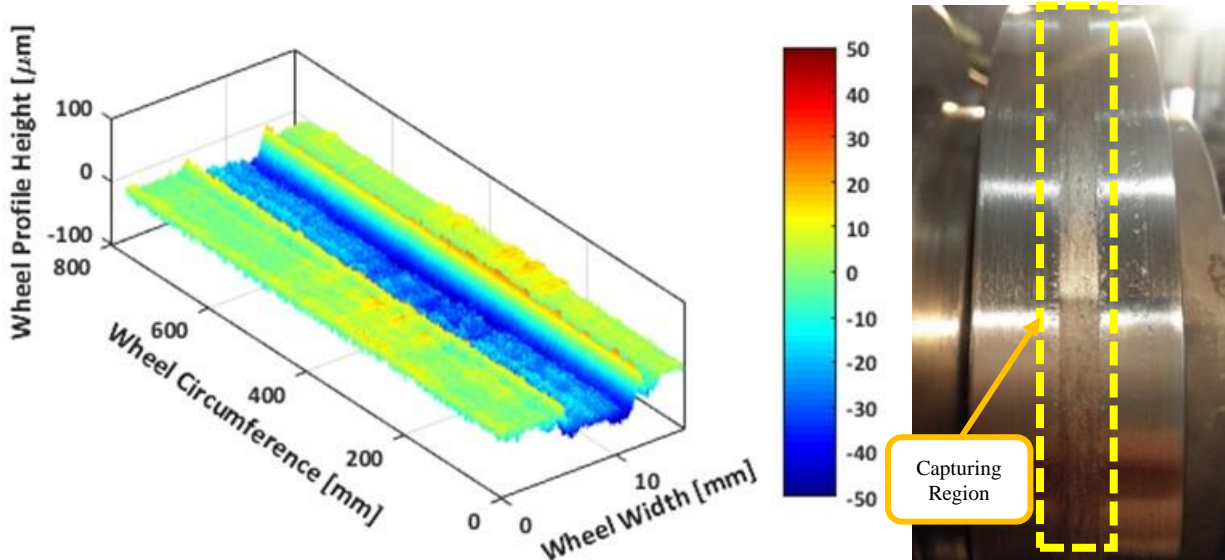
3D Wheel Surface Metrology (Left) - Actual Wheel Image (Right)
